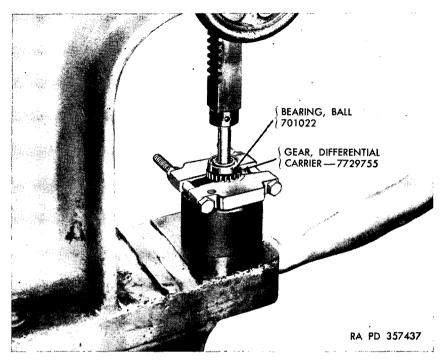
Pressing differential carrier out of carrier gear and bearing.
